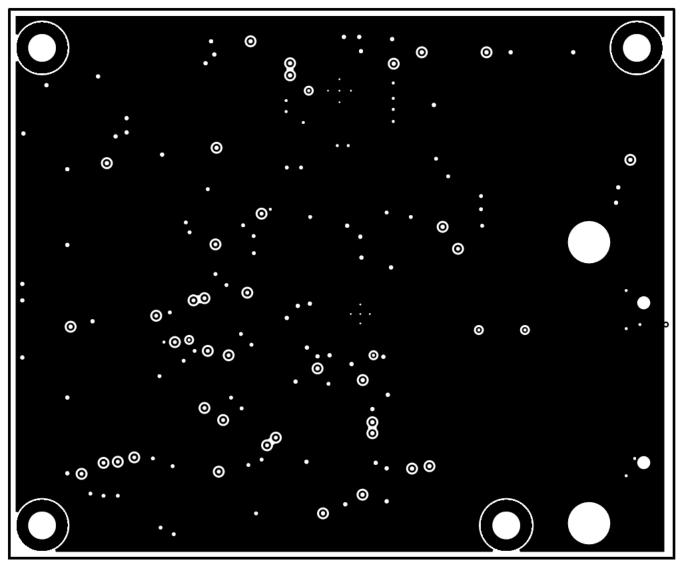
ADS9120EVM PCB Layer 2: GND Plane
